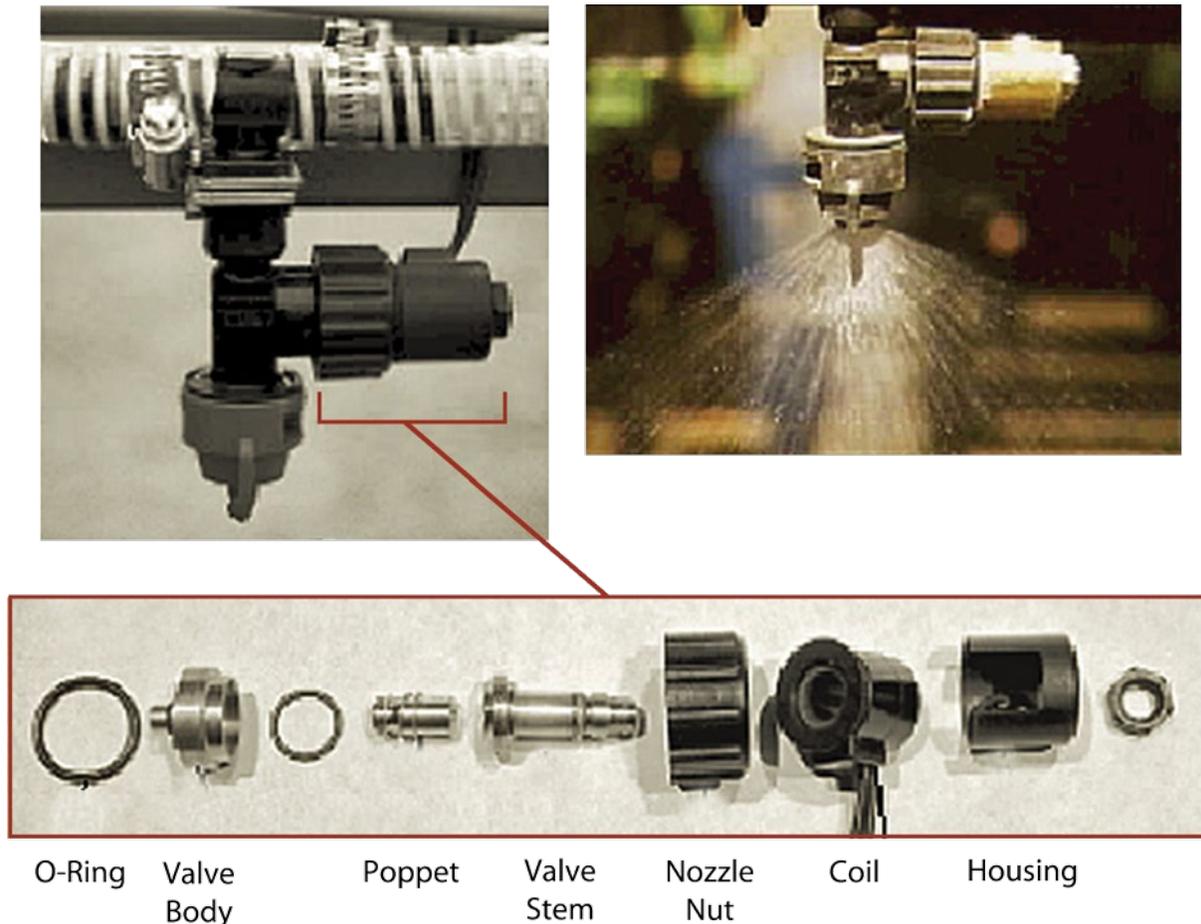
Fast-acting, electrical, solenoid-controlled nozzle assembly.
